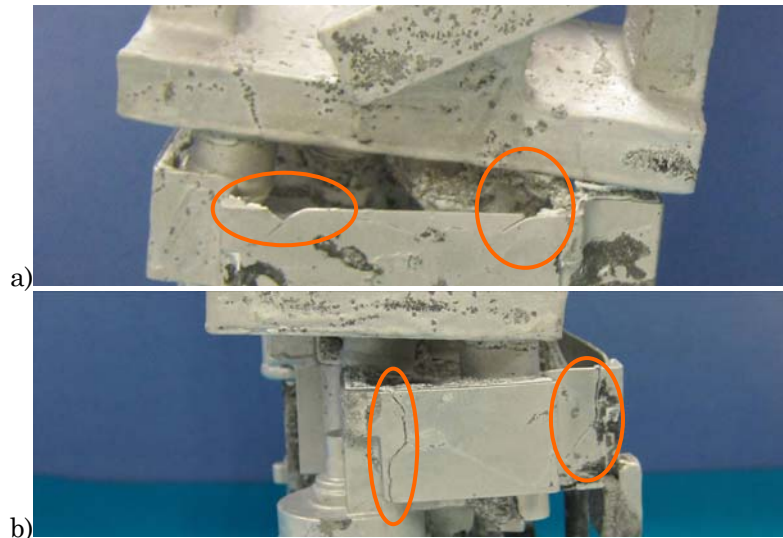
a) and b) detailed view of filling defects found on the casting
